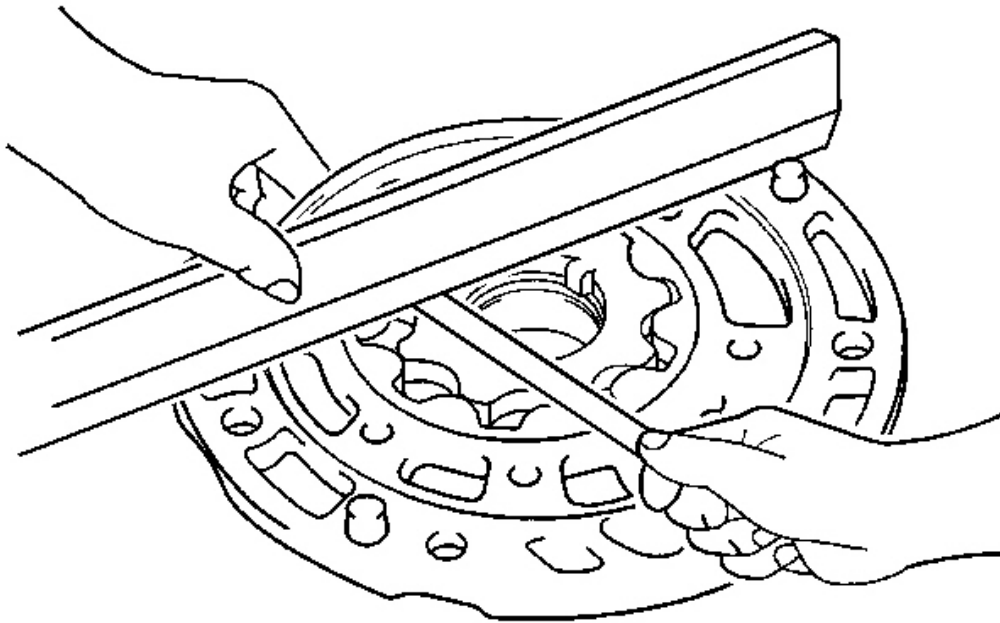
Measuring The Side Clearance Of Both Gears Using A Steel Straight Edge & Feeler Gage
